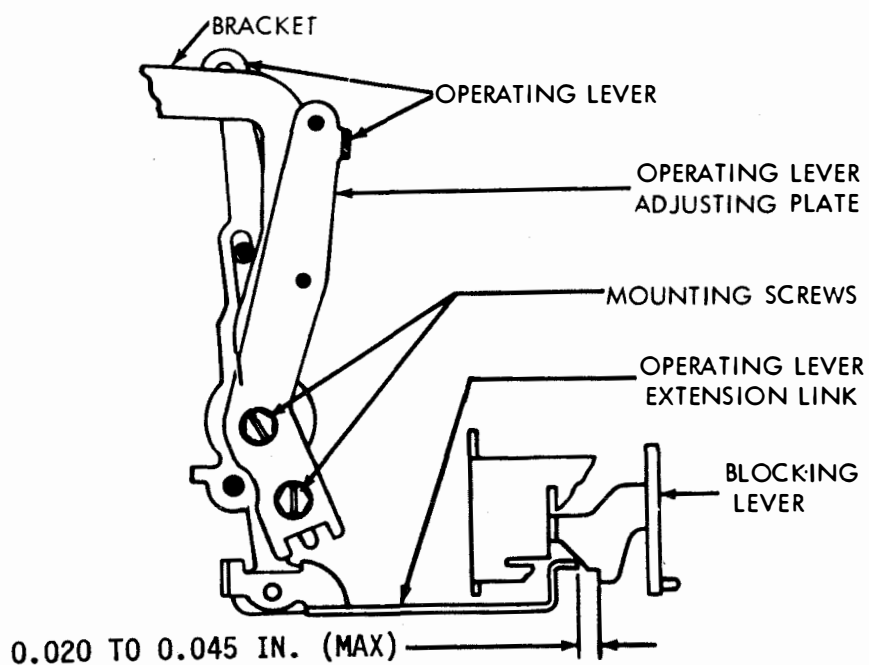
Operating Lever Adjusting Plate, Left Side View
